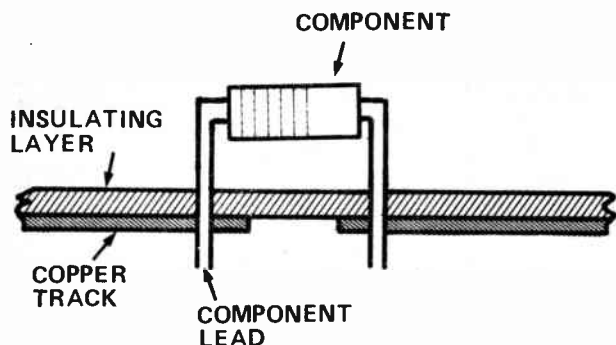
Section of a circuit board showing the insulating layer, thin copper strips and a component
